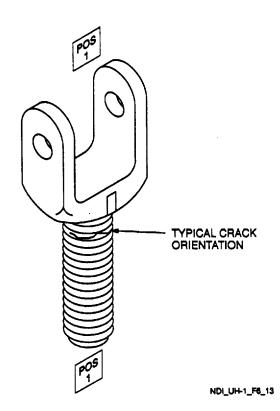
Hydraulic Servo Cylinder Assembly (Collective Control) Clevis
